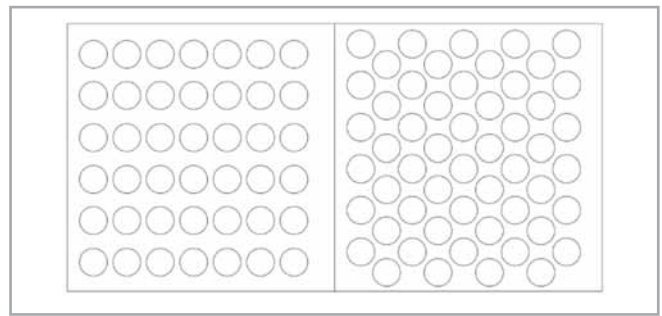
Examples of nesting. The solution on the right, obtained by laterally translating the film, clearly reduces the scrap material.
